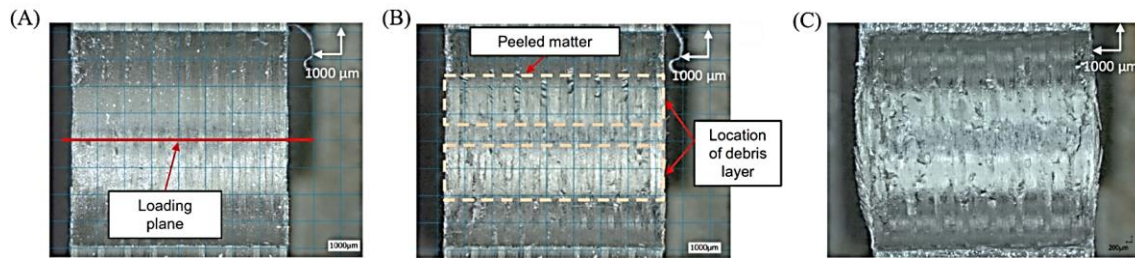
Hole wear caused by fatigue loading in composite bolted joint [27].
